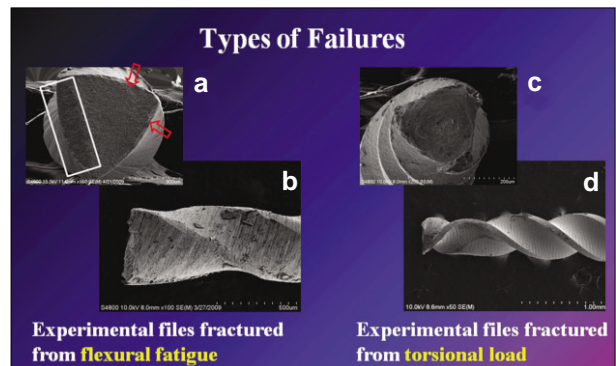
Fracture modes of Nickel-Titanium rotary files. (a, b) Experimental files fractured from flexural fatigue. Figure (a) shows crack initiation zone (arrow) and fast fracture zone (box) which are common findings in cyclic fatigue fracture. (c, d) Experimental files fractured from torsional load. Figure (c) shows circular abrasion marks and skewed dimples at the center of rotation which are common findings in torsional fracture.
